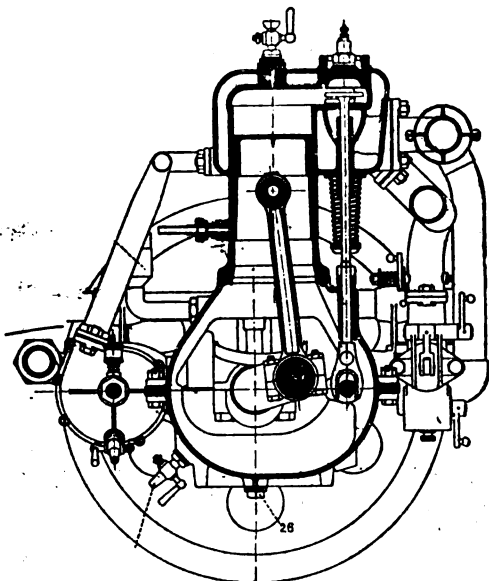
Cross Sectional View of F.N. 14-16-h.p. Engine, showing "desaxe" crankshaft.
